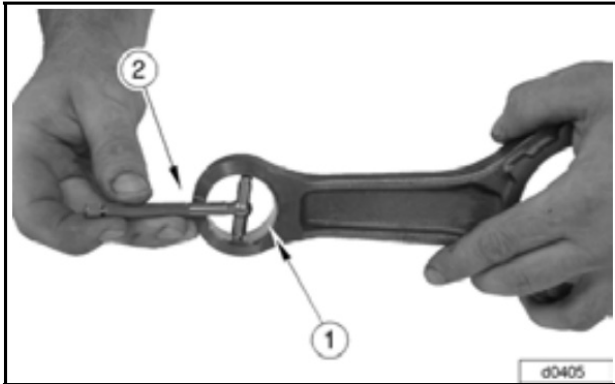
Measuring the Inside Diameter of the Piston Pin Bushing
